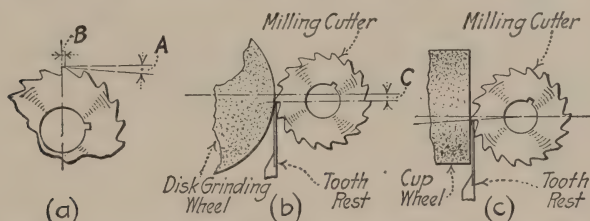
Grinding the clearance on milling cutters. The angle of tooth clearance is measured from a line at right angles to the radial as shown, *A* representing the clearance, and *B* the land of the tooth. To obtain the clearance, the tooth rest must be a given distance below the center of the cutter as shown in (a) and (c). For the amount *C* to set the tooth rest below center, see Table 14, page 491.
